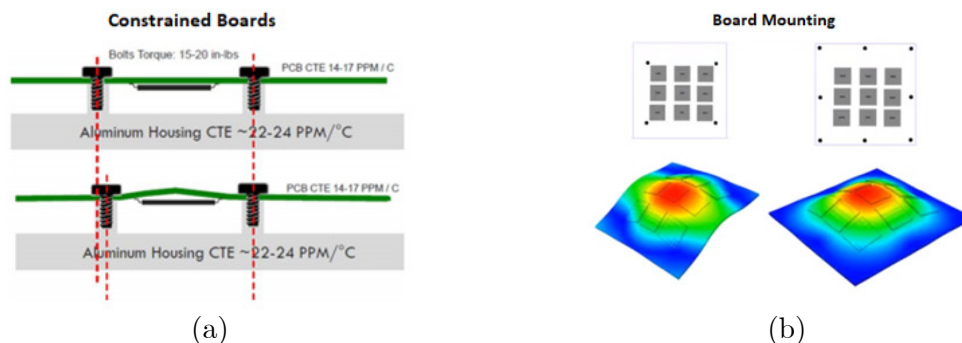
Real Case PCB Solder Joint Fatigue [100].
